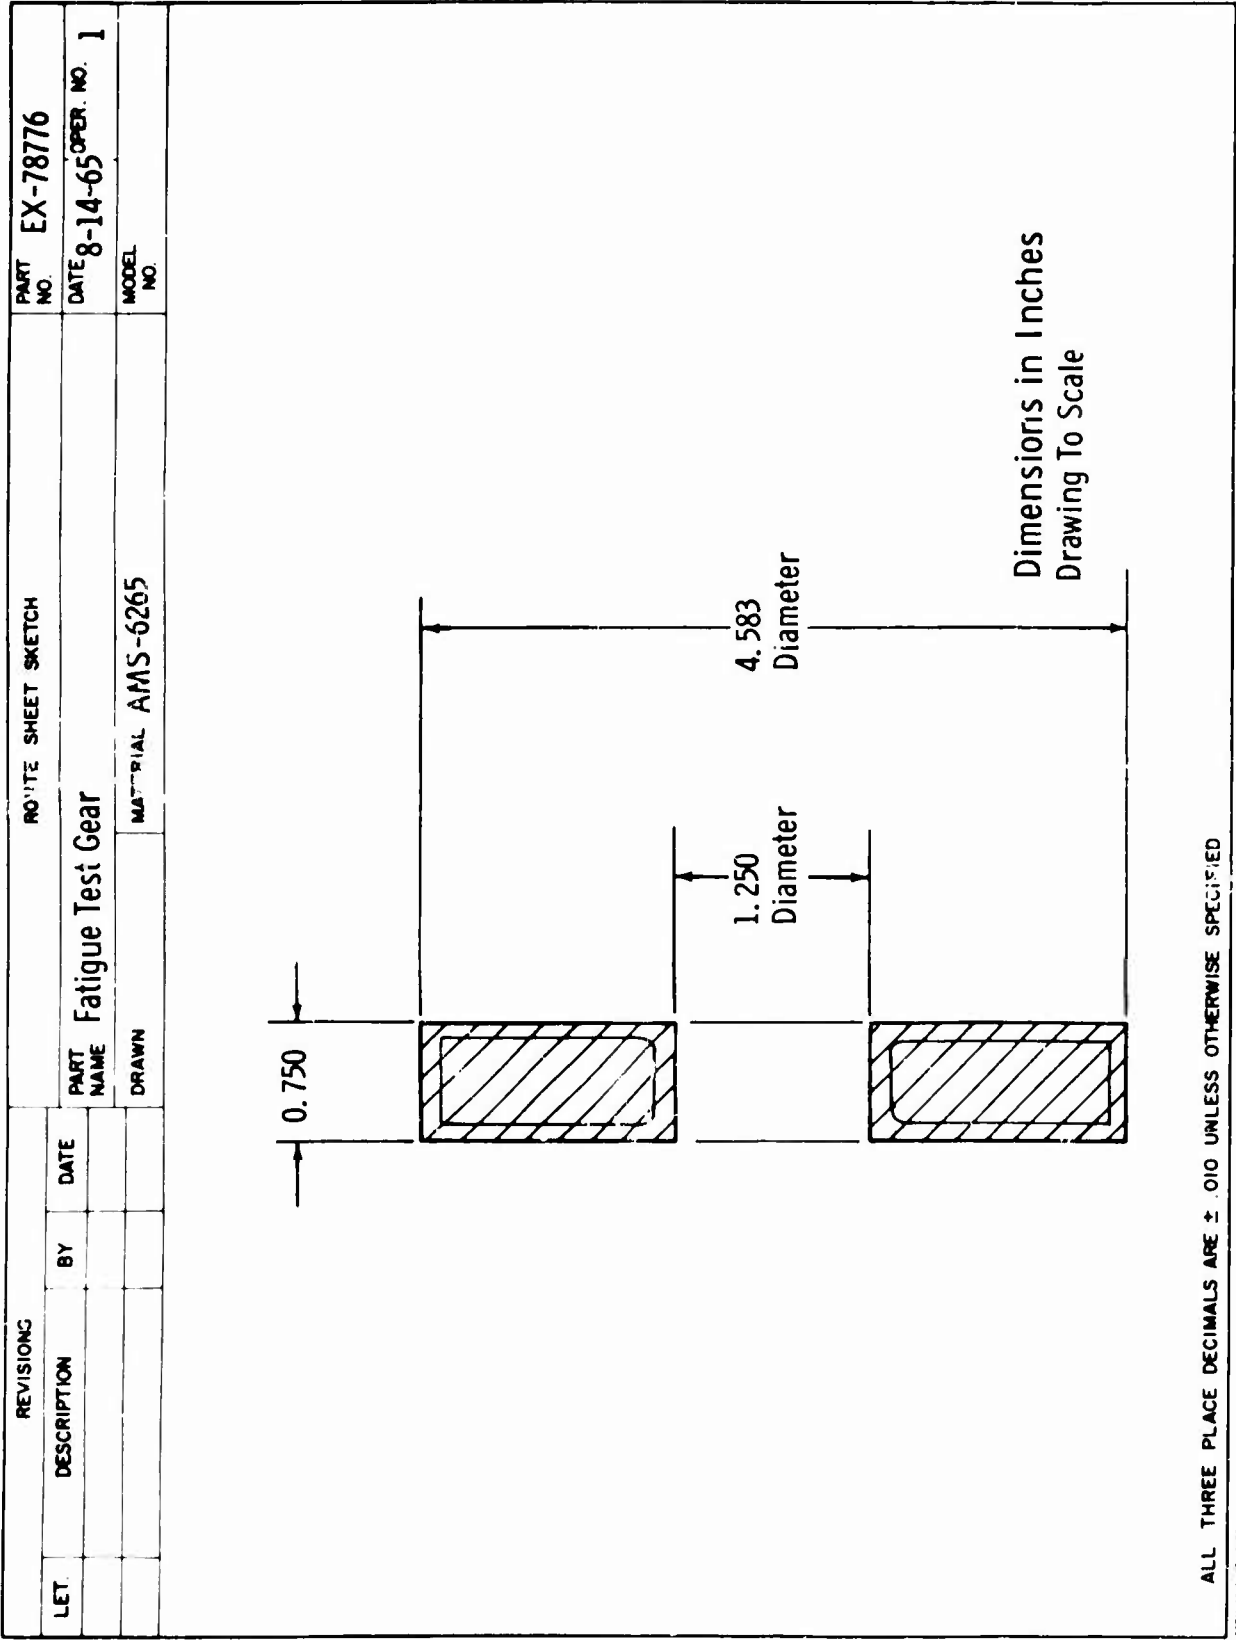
Typical Routing Sheet for Protuberant Hobbled Gear, EX-78776 (Sheet 6 of 9).
